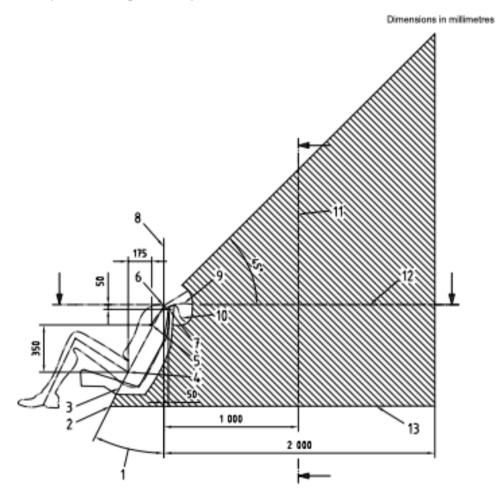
Top tether anchorage location — ISOFIX zone — Side view
